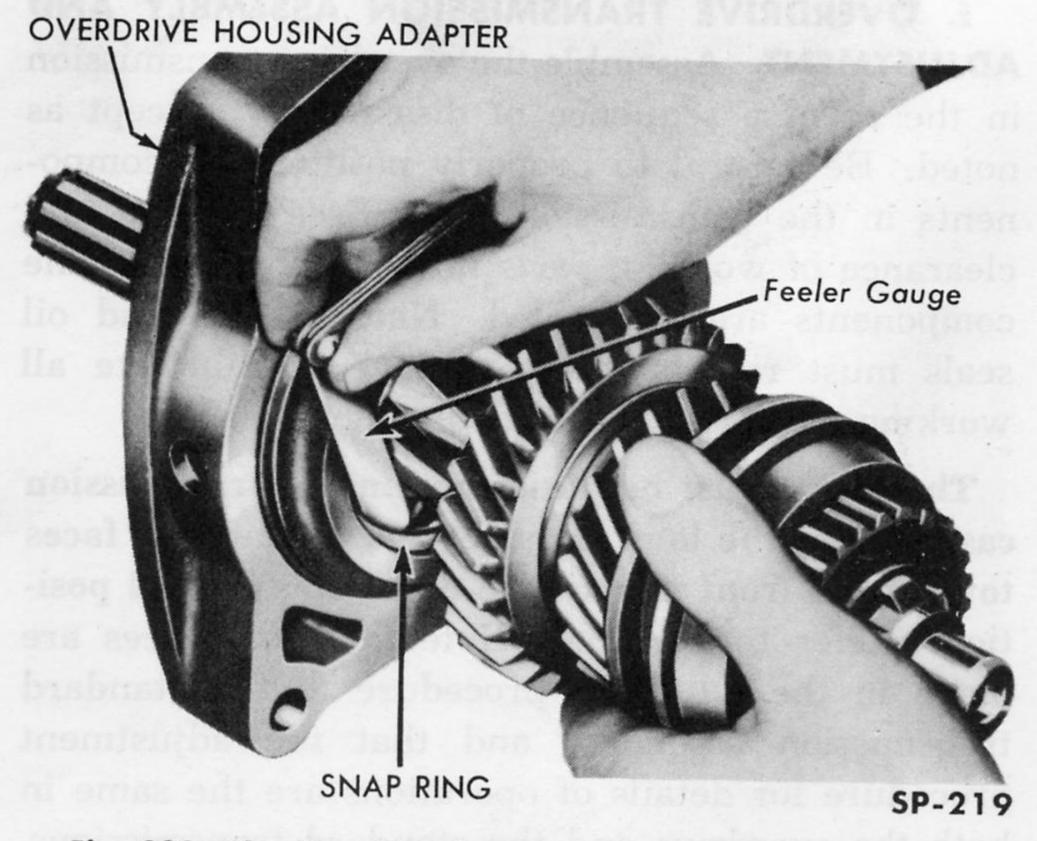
Checking Fit of Bearing Snap Ring In Adapter
